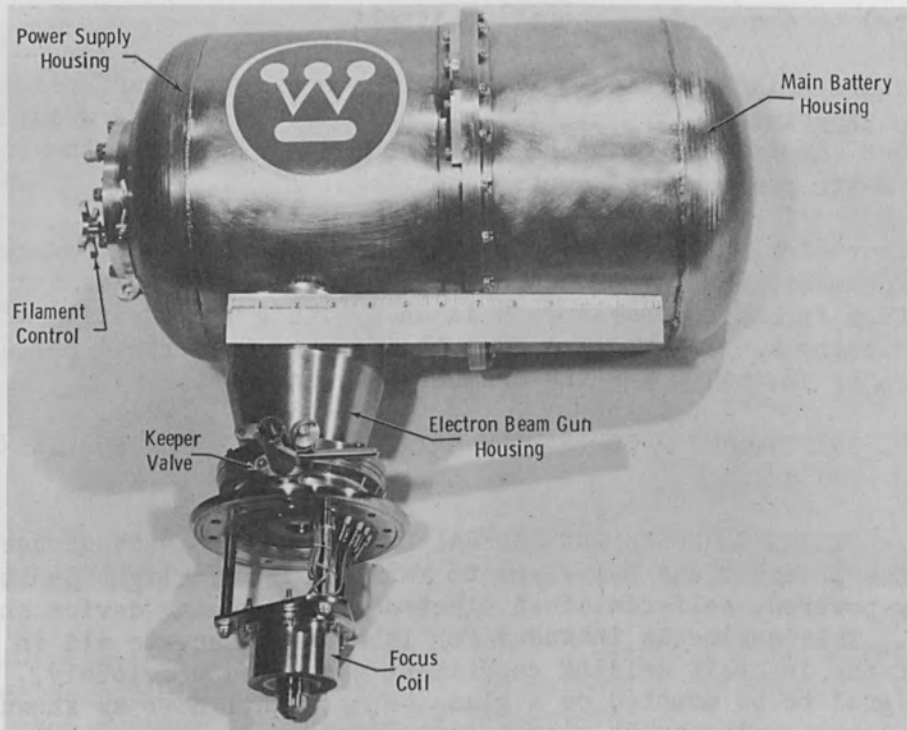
The laboratory battery-powered electron beam welding device.
